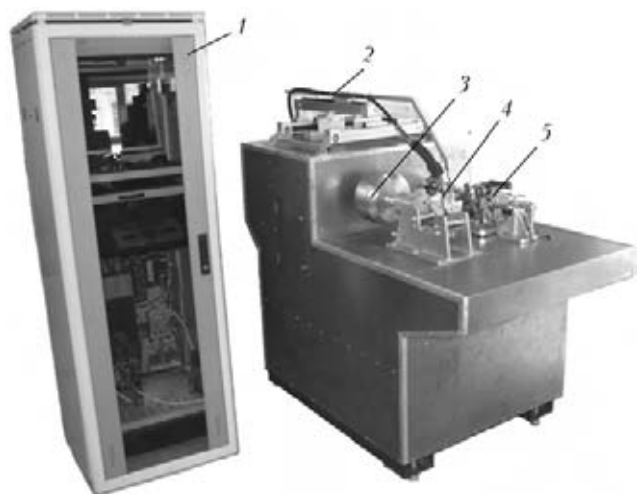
General view of machine MIS for HC testing on the RF standard: 1 – box for control of test parameters, their imaging and registration; 2 – manipulator of welding head for its movement along x , y and xy axes; 3 – force measure device; 4 – machine for welding of samples and their bending or tensile tests; 5 – machine for simulation of welding cycle in the samples and HC tests at cooling stage
